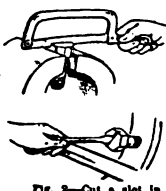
Cut a slot in a cap screw head with a hack saw and use screw driver to start cap screws in inaccessible places.
